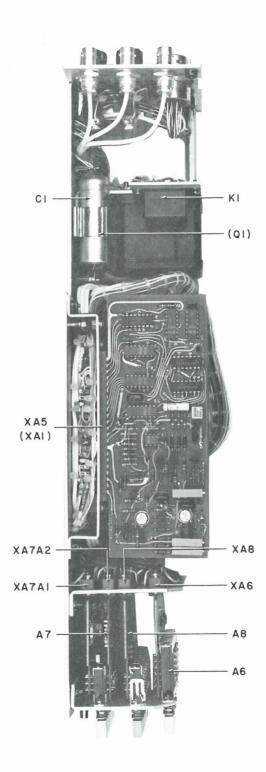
Type 791130 Control Module Assembly, A4, Left Side View, Component Locations
